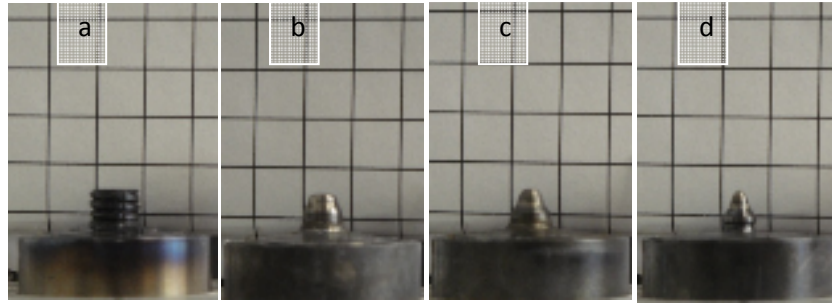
Comparison of tool shape for spherical tools used in panel welds. From left to right: a) virgin tool profile, b) tool after welding 3 ft of Al 359/SiC/20p, c) a tool used to weld 6 ft, and d) tool after 9 ft of weldment.
